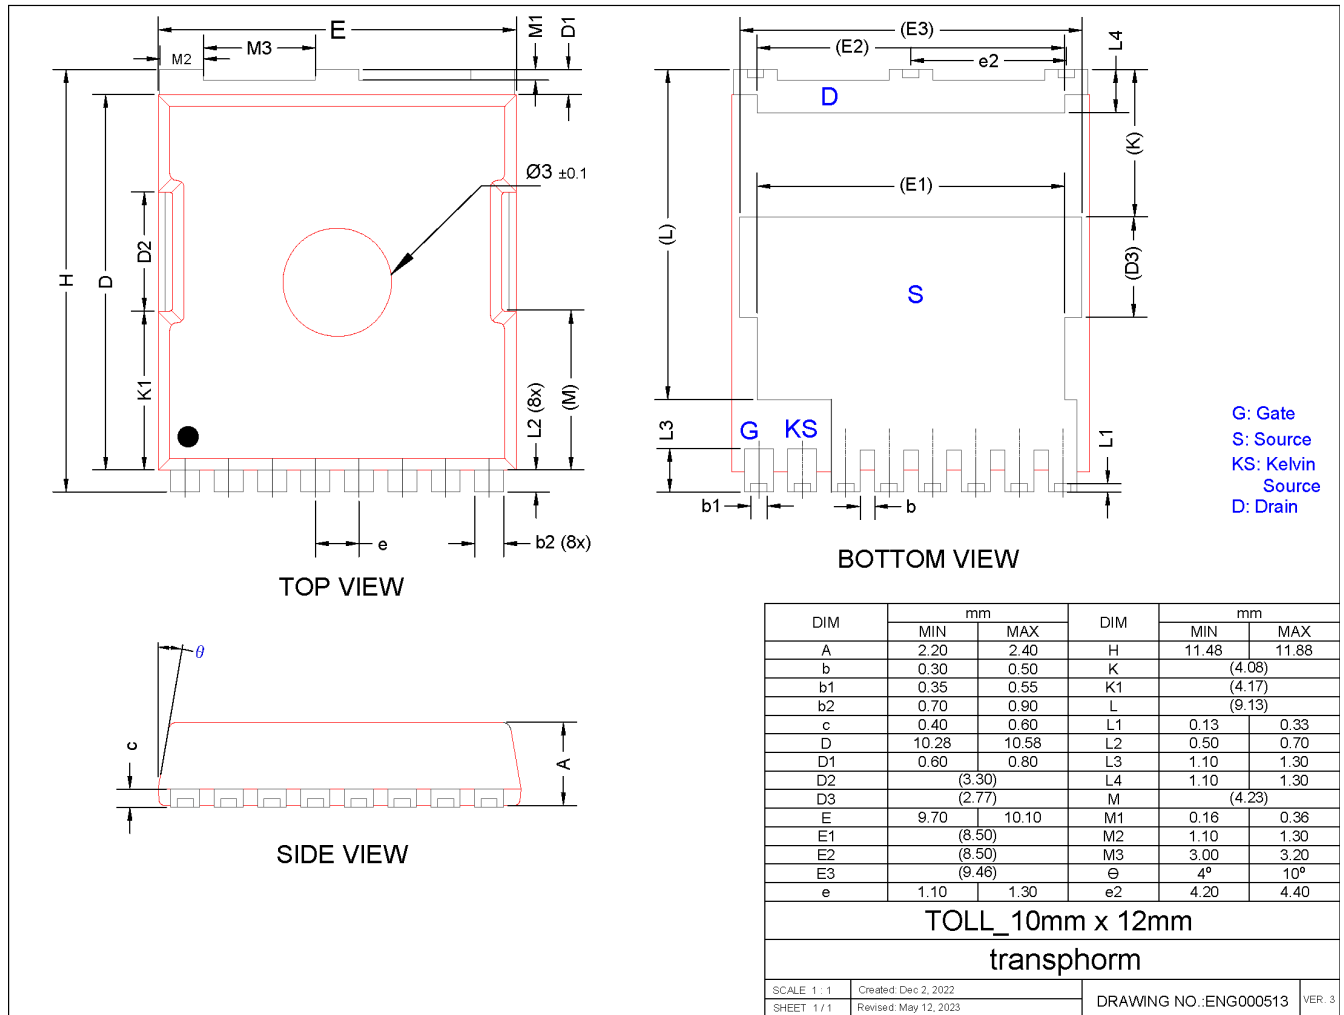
10 × 12 mm TOLL Package Outline Drawing
